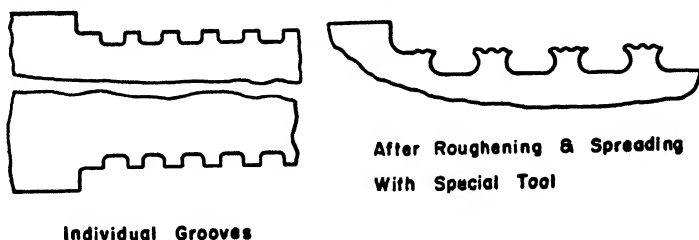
Type of groove preparation used for anchoring metallized surfaces that are to be machine finished (sketch of roughened grooves is to a larger scale than original grooves).
